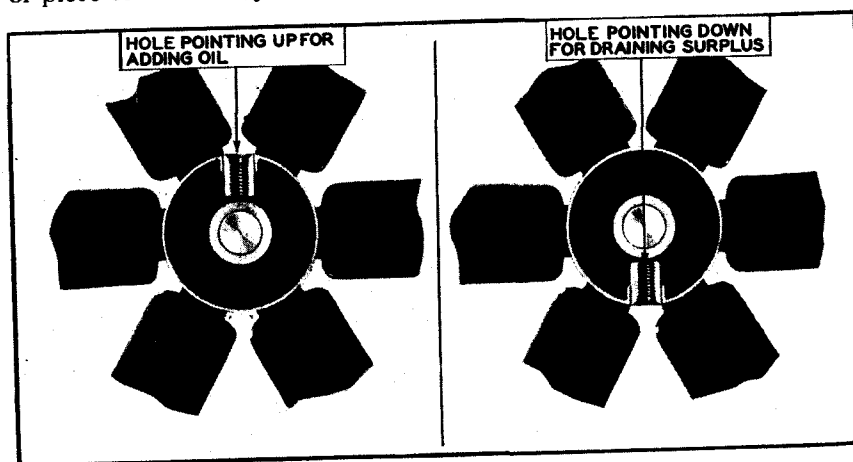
Oil for lubricating the fan is carried in the fan hub. The supply should be replenished every 1000 miles. Grease or heavy oil must never be used in the fan.
